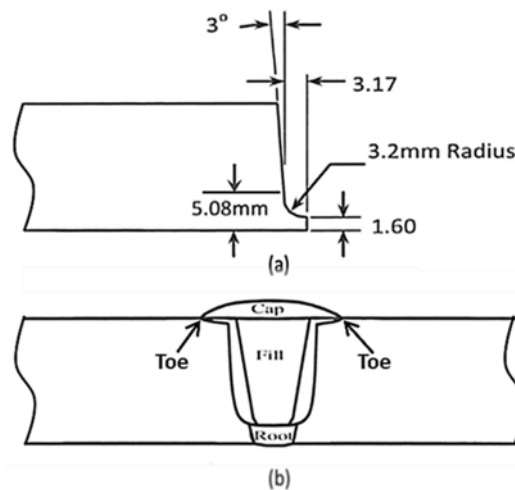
(a) Geometrical details of the weld groove and (b) Schematic representation of the welding procedure
